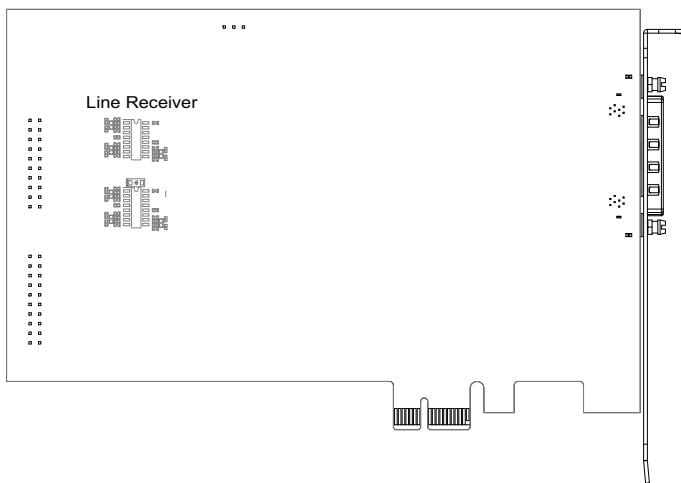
PCIe-9161/9163 PCB Rear Layout
